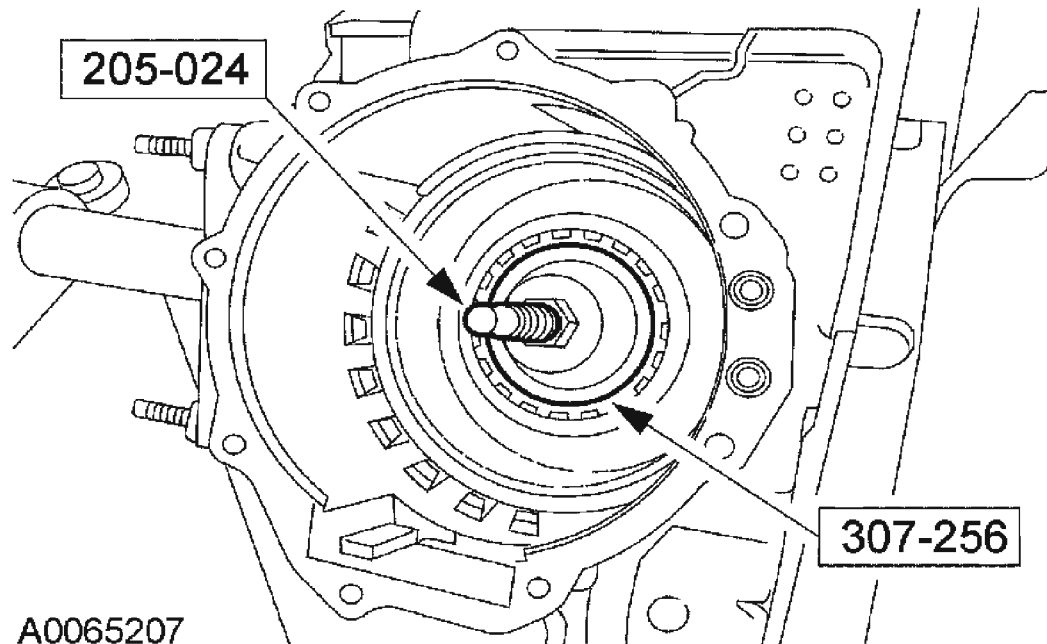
Installing Final Drive Input Gear Bearing Using Special Tool
